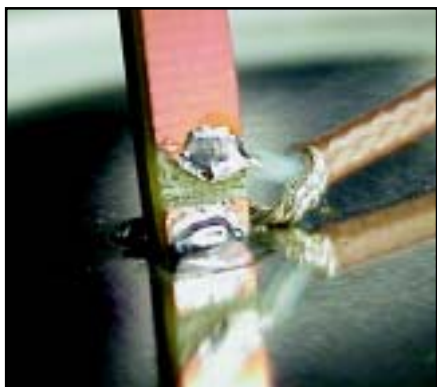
Close-up view of the coax connection to PCB transmission line and support.
